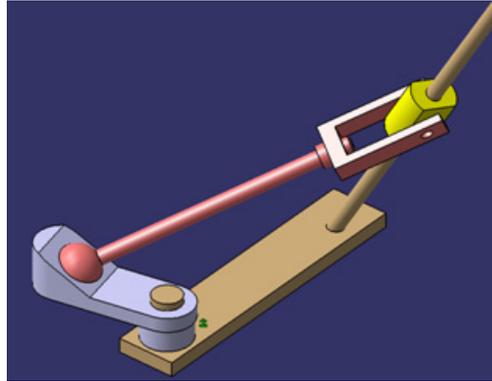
The revolute-spherical-revolute-cylindrical (RSRC) mechanism
